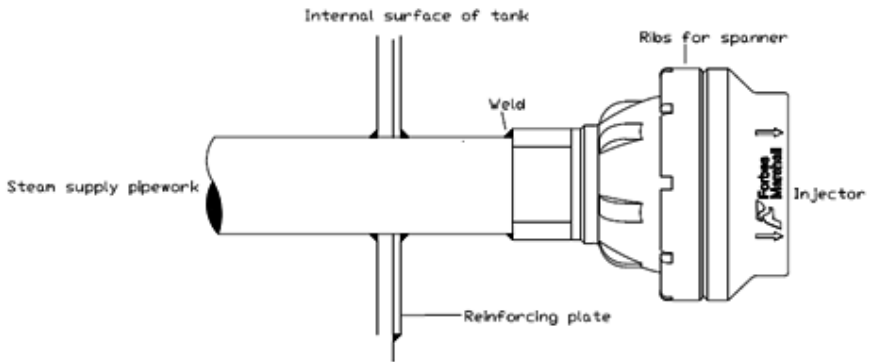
FMINJ25 /FM INJ40M- Typical screwed installation direct to pipework
